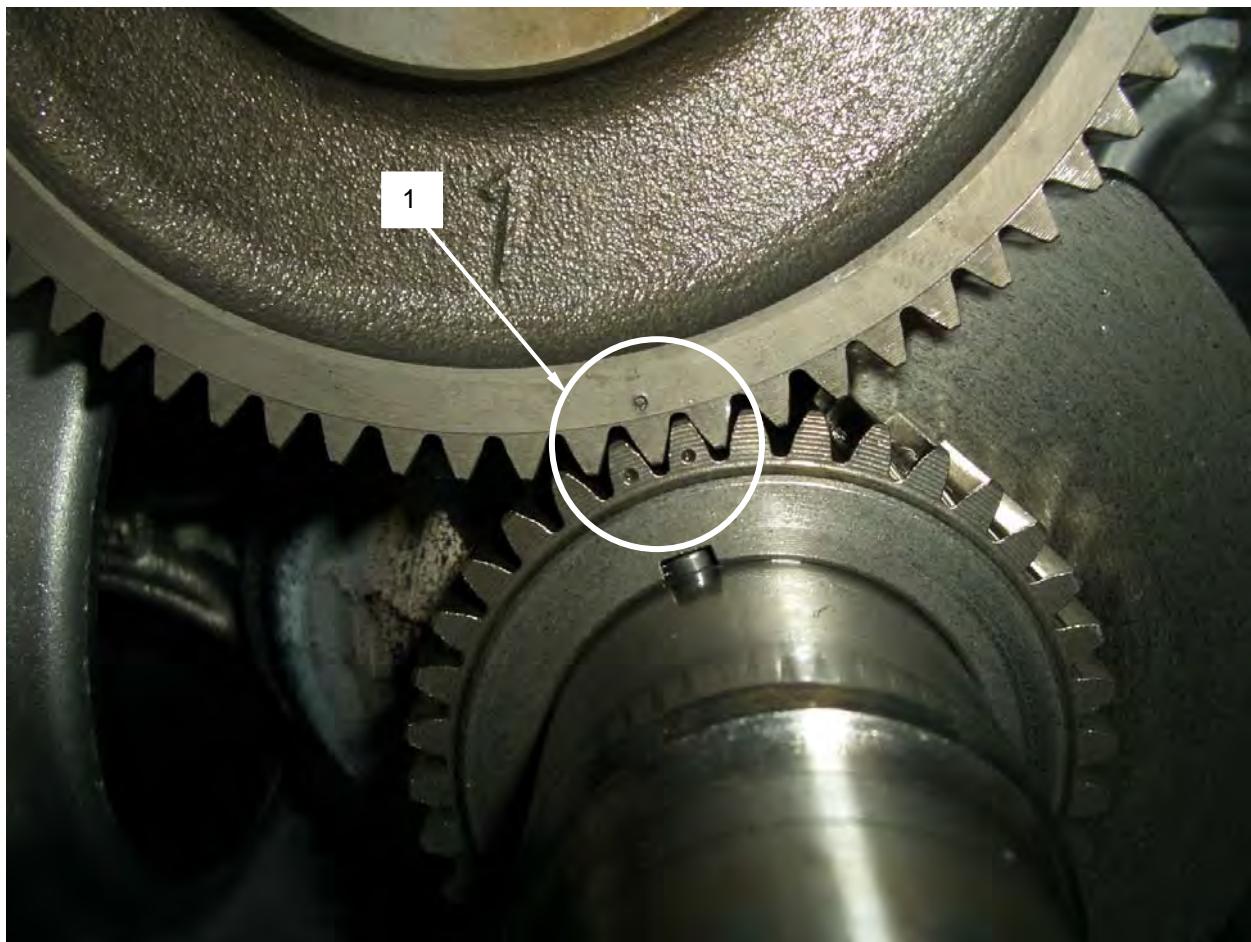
Inspect and Install Camshaft Assembly (Sheet 1 of 3).
